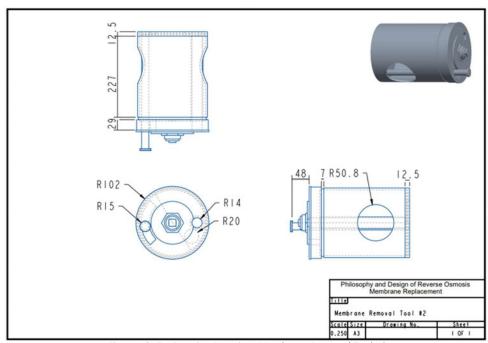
Engineering Drawing: Membrane Removal Tool #2
